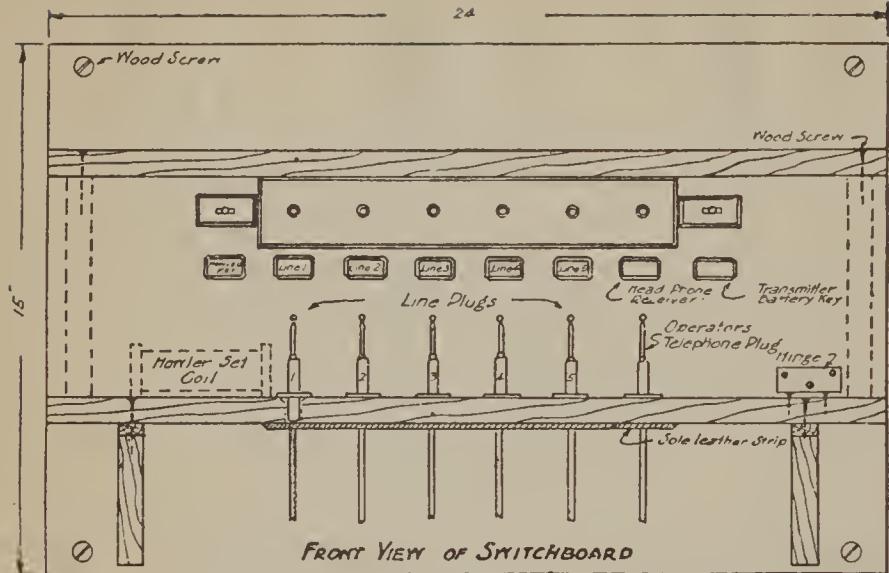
Location of plugs and jacks in a 5-line switchboard. Space the jacks about 2 inches apart, and corresponding plug directly in line. If howler coil is used (see fig. 46), locate as shown in dotted line with key for operating it to left of jack, mounting strip as shown. Locate key for transmitter batteries (see fig. 54), "special equipment," right of mounting strip, as shown
